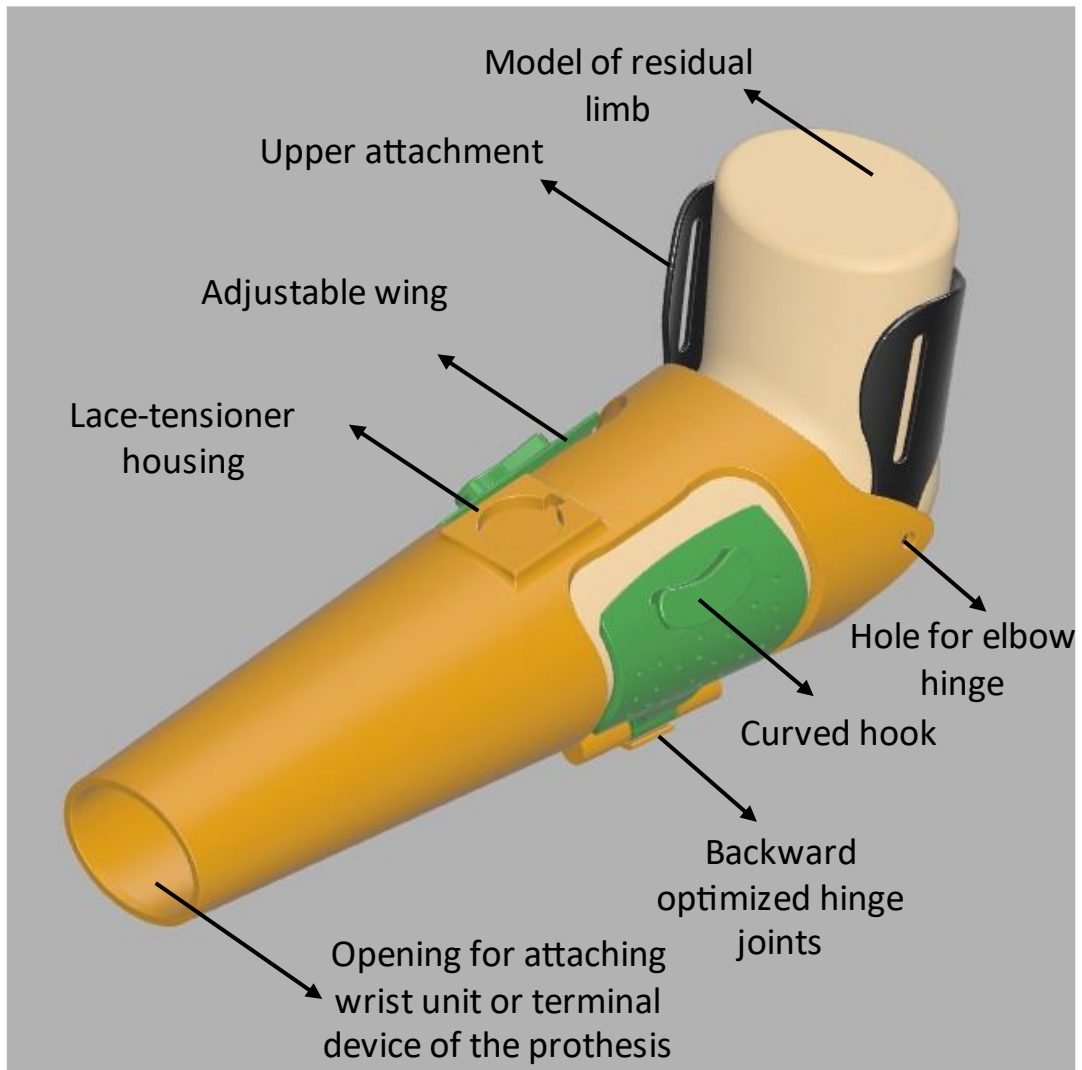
The V3D socket after optimization. The socket offers volume adjustability through the adjustable wings, and a lace-tension mechanism that would be inserted in the tensioner housing. The socket ends with an opening for attaching a wrist unit or a terminal device (artificial hand). That end can be customized to be oval or circular depending on the preference of the user and the type of wrist unit that will be attached. The upper attachment (above the elbow) has two long slots at the sides for attaching a Velcro closure. The upper attachment connects to the lower socket using a screw with flat end that acts as an elbow hinge to allow flexion and extension.
